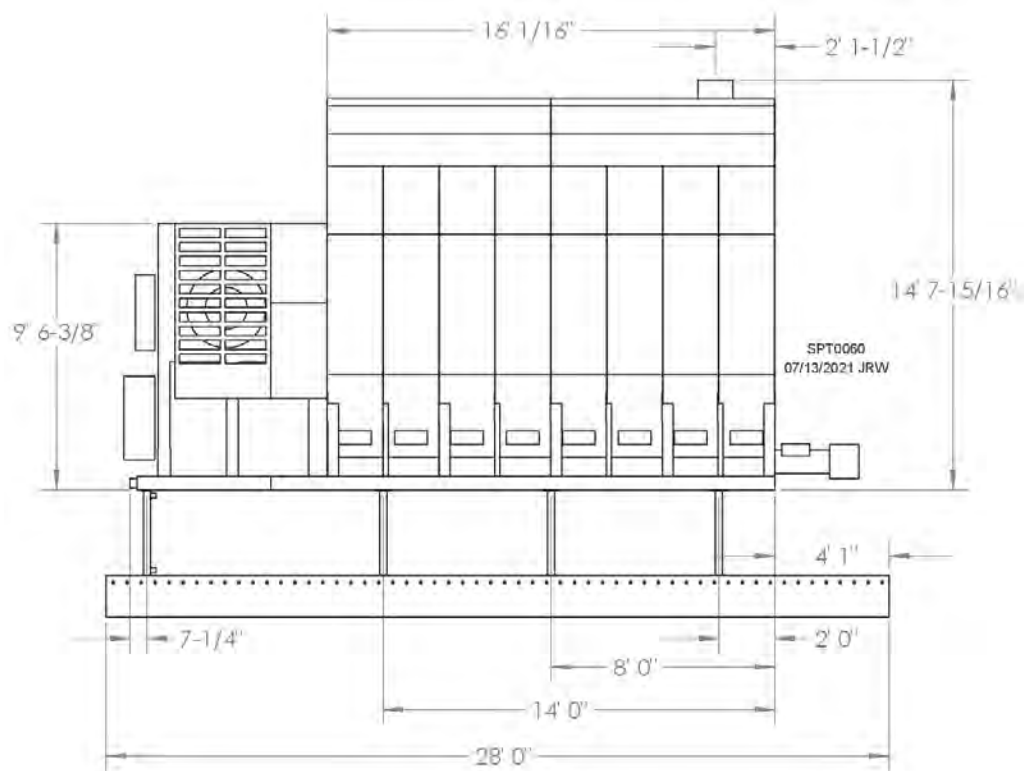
Support leg locations & dimensions (16' dryer)
